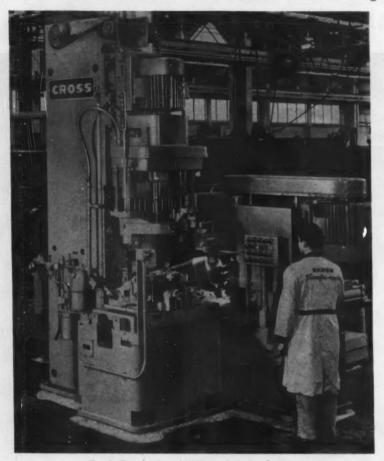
Two-station shuttle machine for finishing exhaust manifolds, built by The Cross Co.
